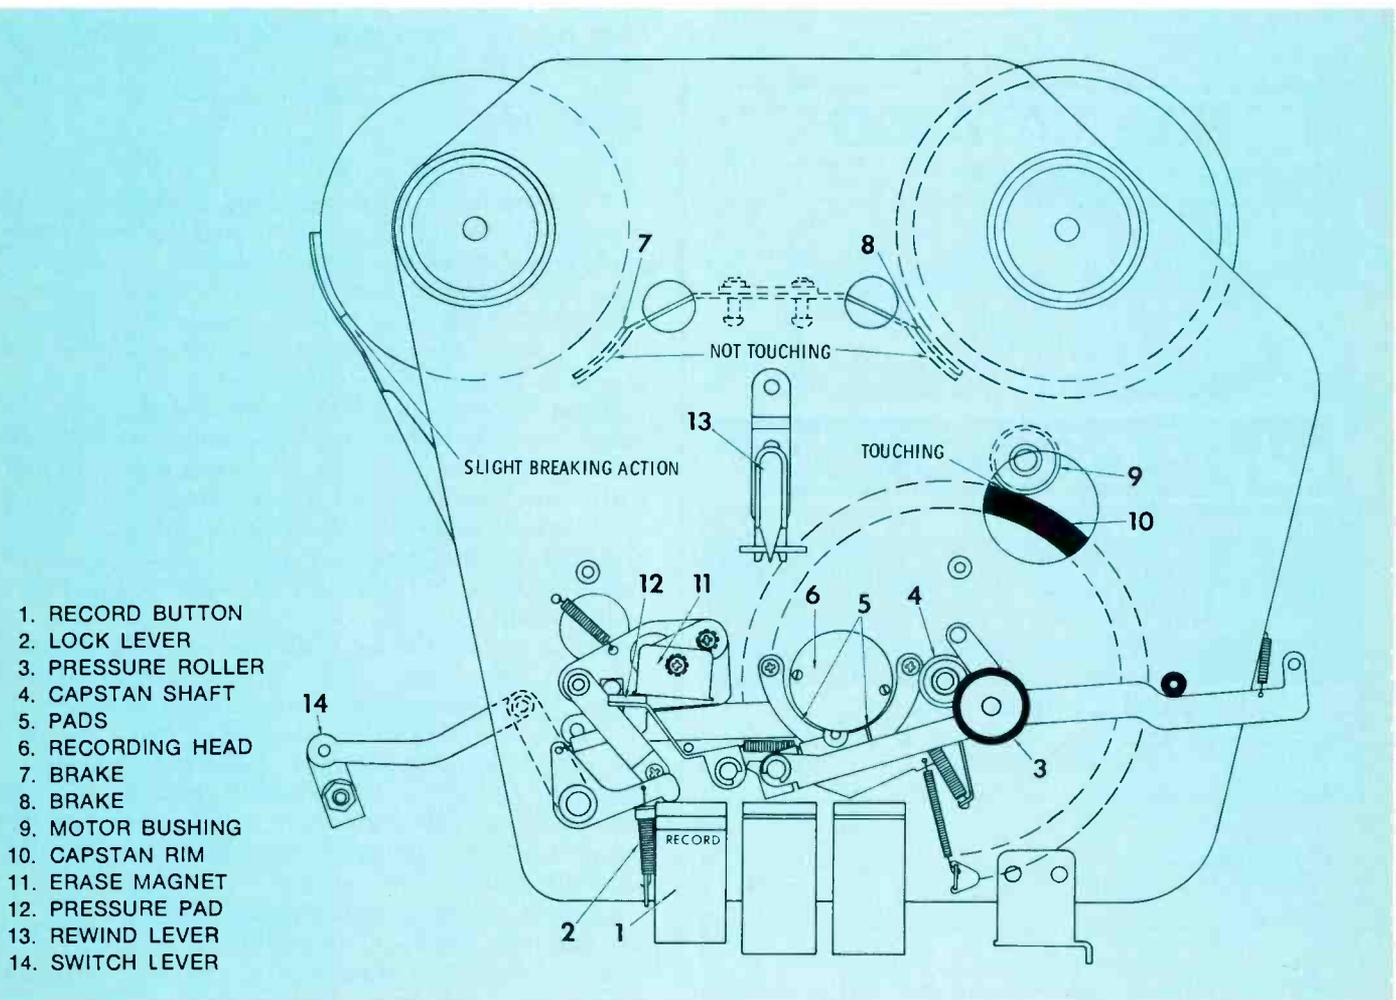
Top view of tape transport mechanism in "Record" position (3¾ in./sec.).
